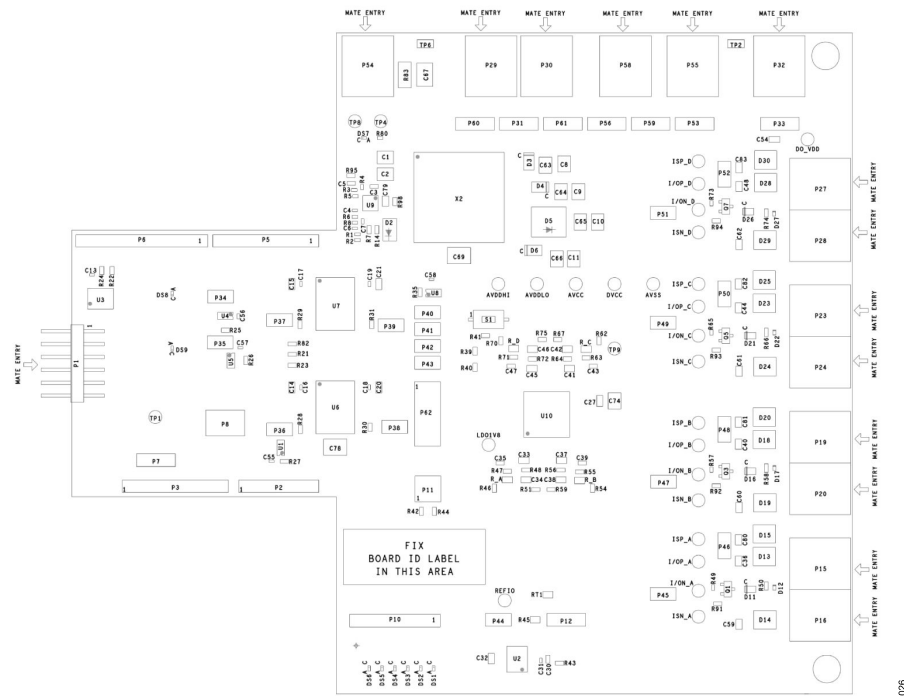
EV-AD74414H-ARDZ Assembly Diagram, Top View
